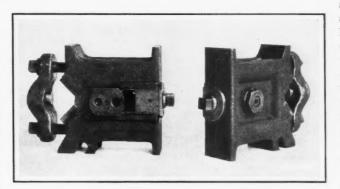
Type of Eud-block furnished with Norton Grinding Machine shown in Fig. 2
